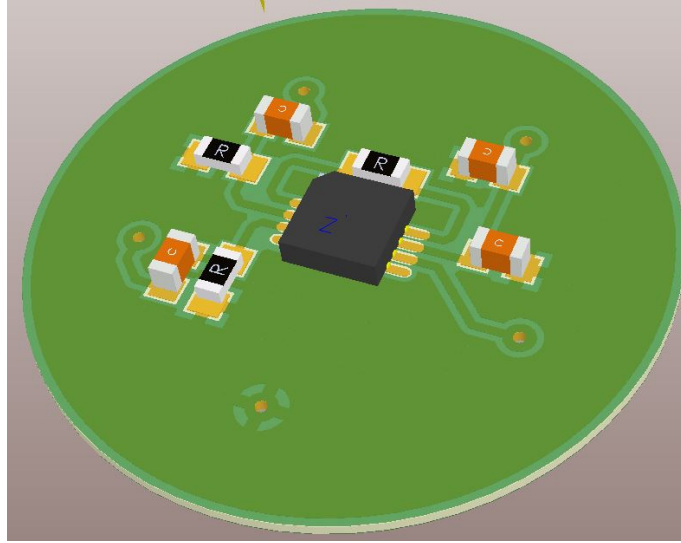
A rendered version of the printed circuit board (PCB) that incorporates the TI ADS1292R and other passive components.
